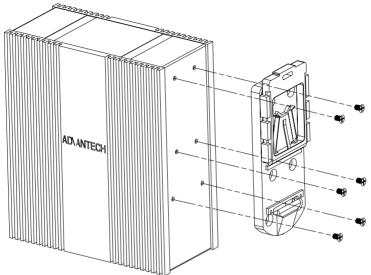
Attach the DIN-rail Mounting Kit to EDG-6528 with Six Screws
